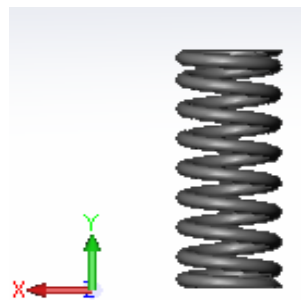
56 Three Dimensional Sketch of Valve Spring
